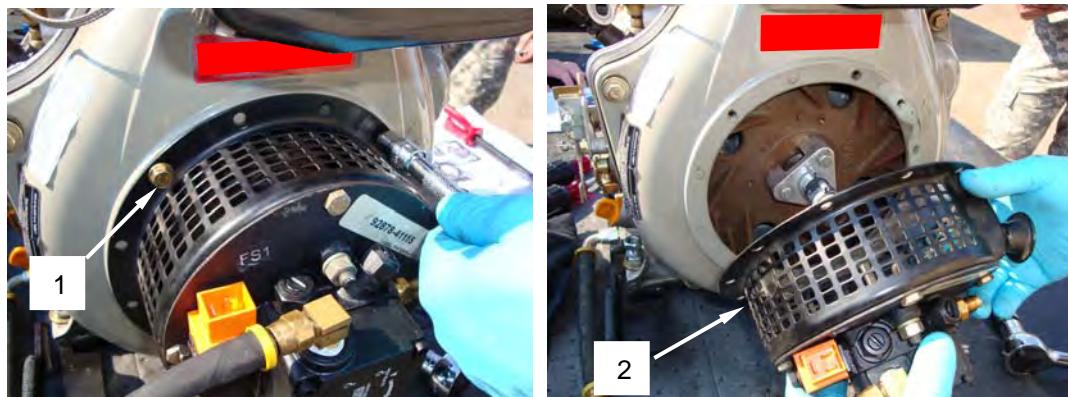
Remove Burner Pump Housing with Burner Fuel Pump Attached.
